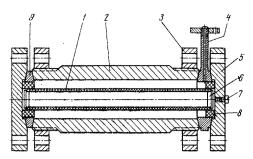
High-pressure chamber for compressing tubular specimens in the σ_1 direction: 1) specimen; 2) body; 3 and 5) flanges; 4) branch; 6) insert; 7) plug; 8) rubber collar; 9) lens.
